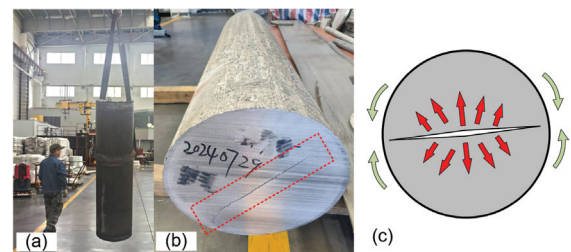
A penetrating crack in a 405 mm-diameter 2195 aluminum alloy semi-continuous casting ingot: (a) product ingot casting; (b) Cross-sectional view of the crack; (c) Arrows indicate that compressive circumferential stress tends to arrest crack propagation
